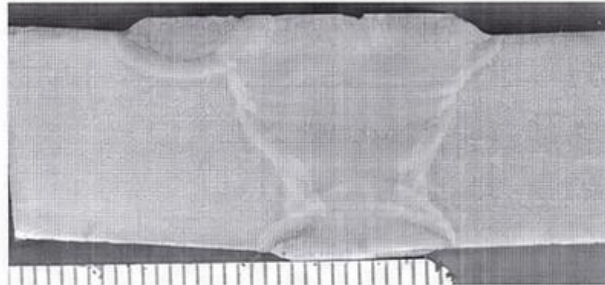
The macro-etched cross-section of the weld joint reveals no visible cracks, porosity or slag inclusions which confirm sound quality of the weld joint
